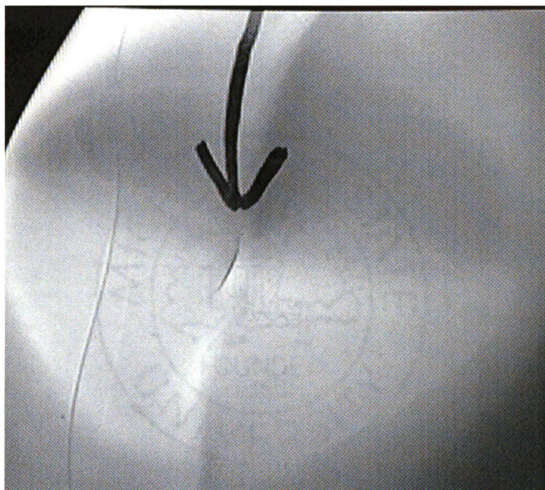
Detailed view of glass surface cleaner bottle shoulder dent of Figure 9.
